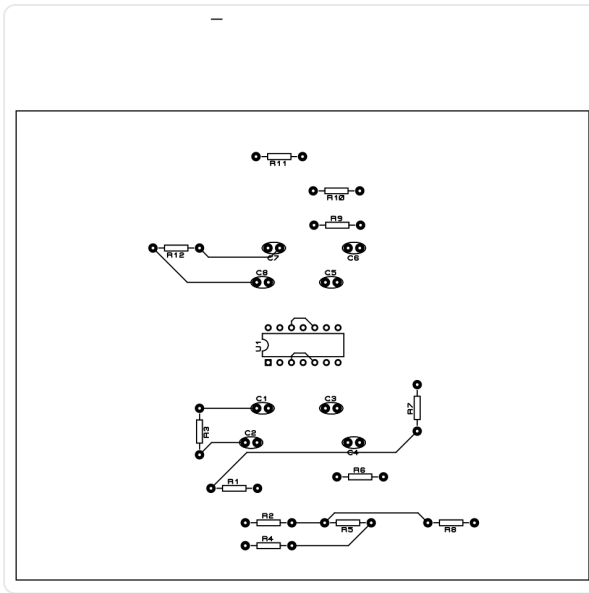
PCB top layer — component placement (silkscreen): one 16-pin integrated circuit (U1), 12 resistors (R1–R12) and 8 capacitors (C1–C8).
